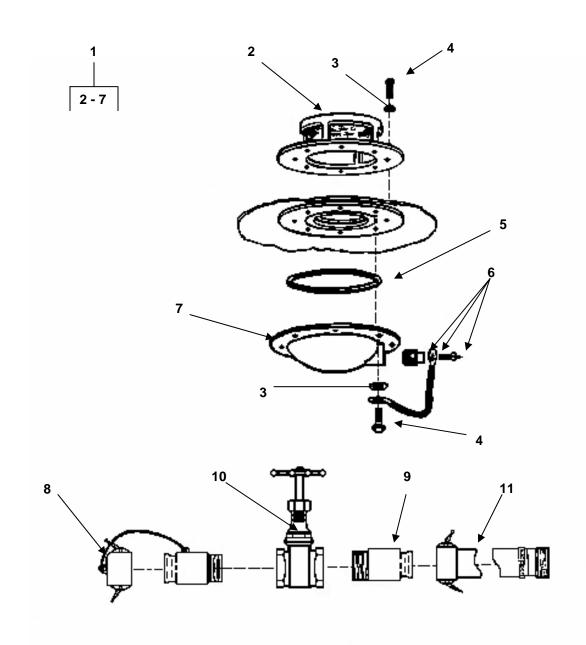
Drain Fitting Assembly and Gate Valve (Model PD5430-0001)
